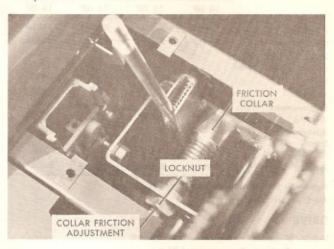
SPEED CONTROL LEVER TENSION ADJUSTMENT
